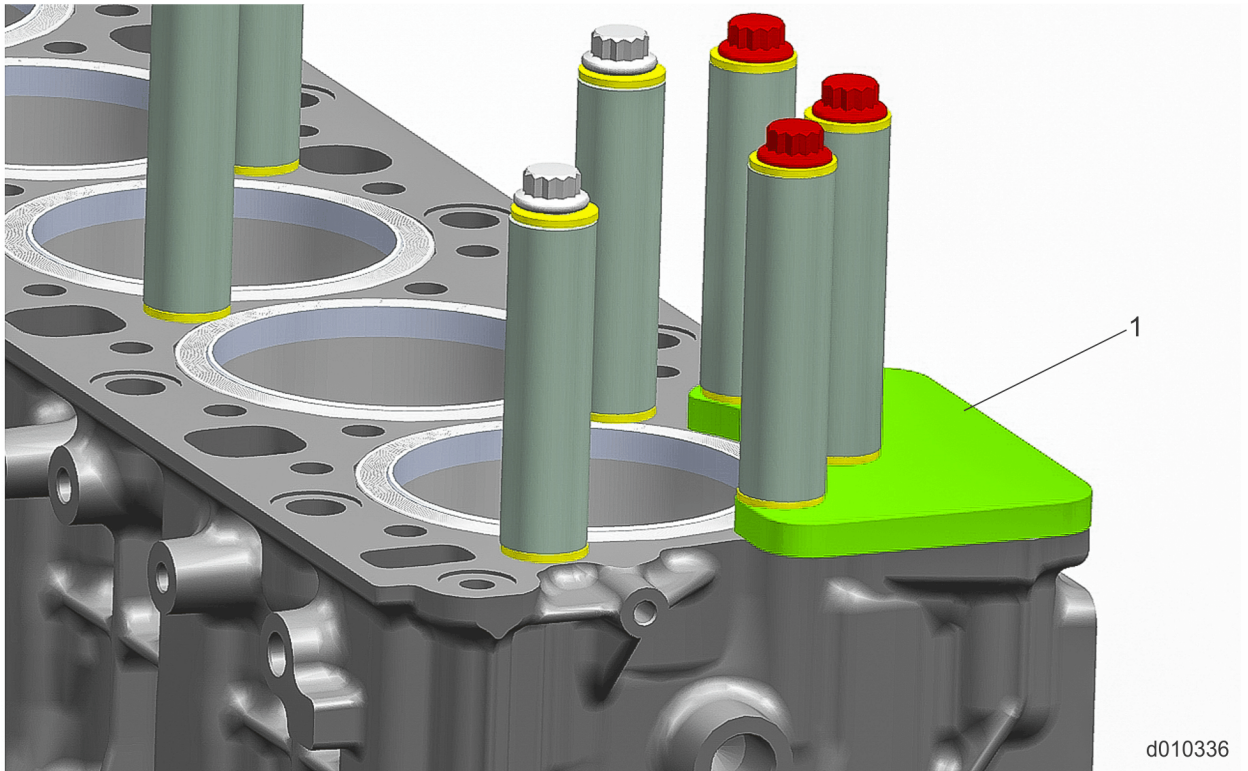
DK1470E16024-1 - Cylinder 1 Top Plate (left)
